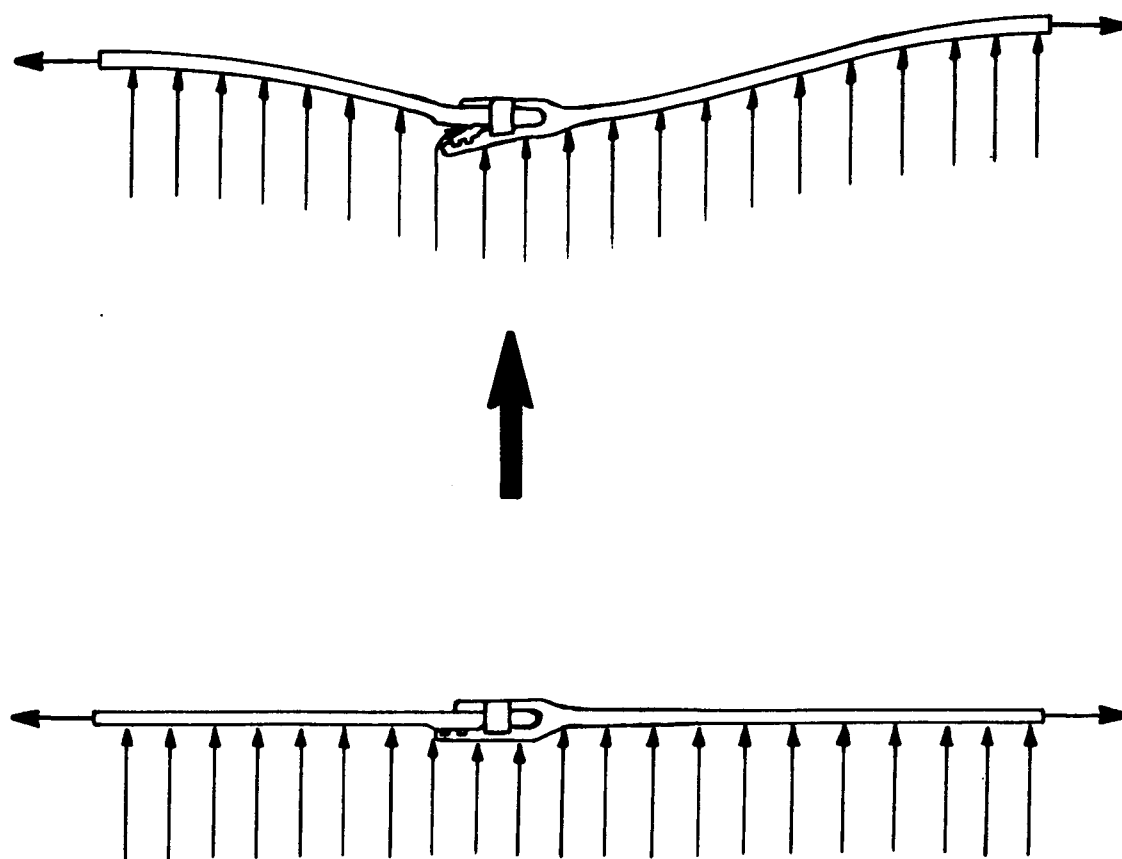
Deflection shape of a tang-clevis joint due to internal pressure.
